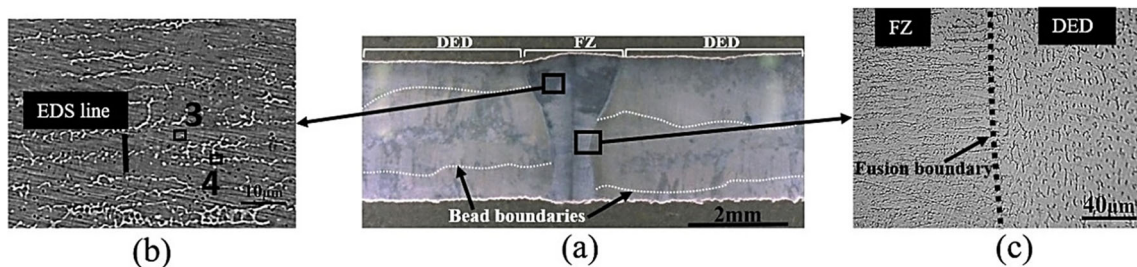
The transverse-section optical images of Weld DED-P sample. a Optical micrograph showing the weld zone and DED plates. b SEM image of the weld zone indicating the columnar dendrites. c Fusion boundary
